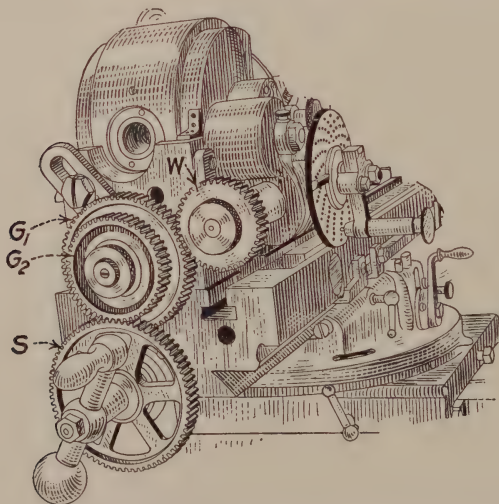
Brown & Sharpe index head arranged for spiral milling.
